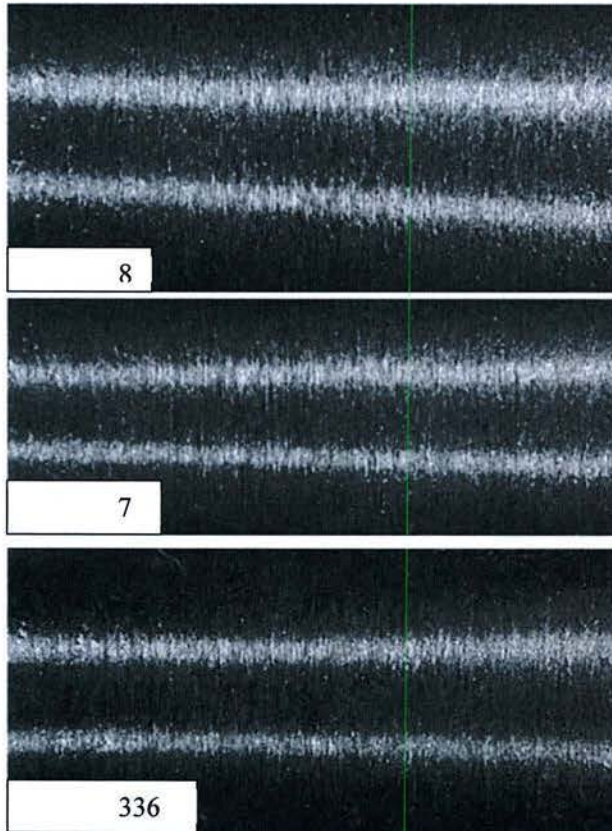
Optical Photomicrographs of Tensile Specimens after Belt Sanding (Mag 10x)
